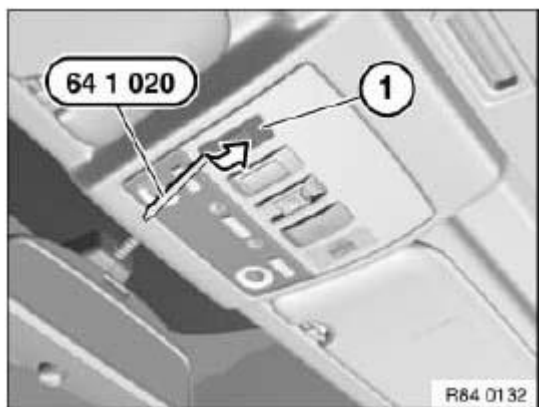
Removing Front Microphone Trim With Special Tool 64 1 020
